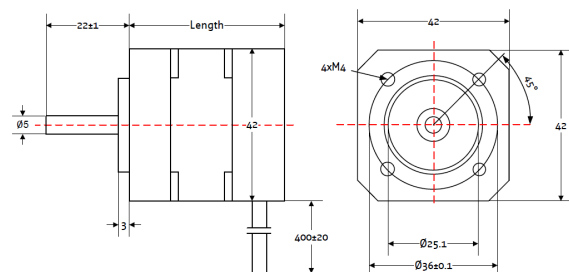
Dimensions of the DC motor used in the experimental test setup.
